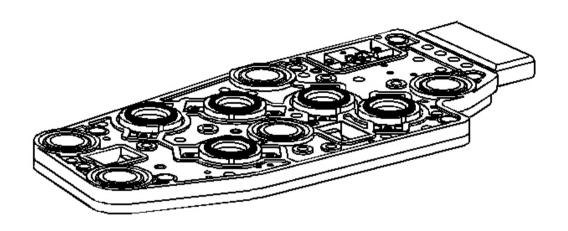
Inspecting The Transmission Fluid Pressure Switch Courtesy of GENERAL MOTORS CORP.
